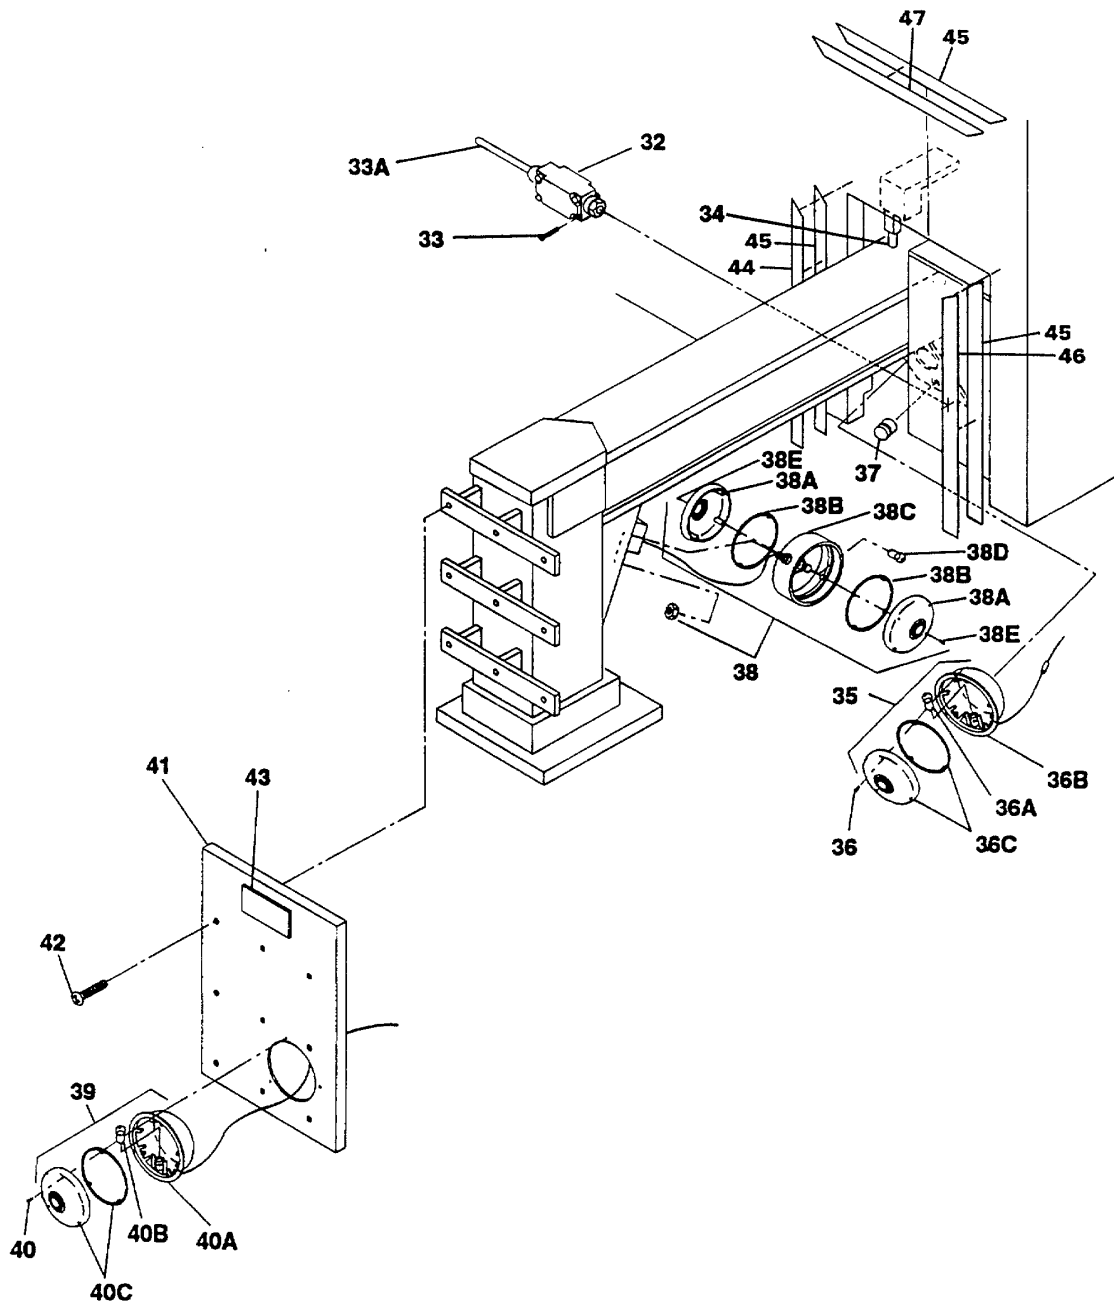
Outrigger Assembly, Sheet 2 of 2
